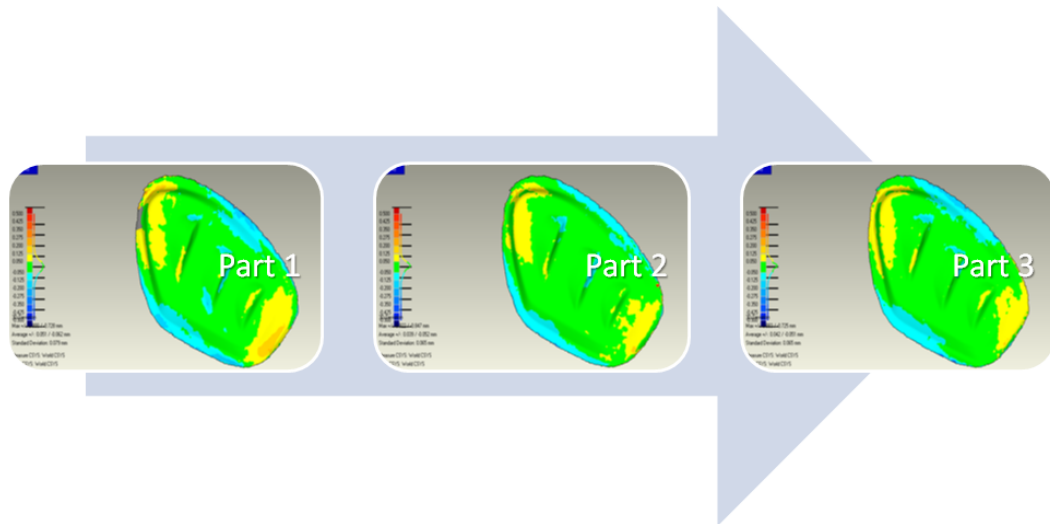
Average distance of 3 parts produced with the aluminium mould
